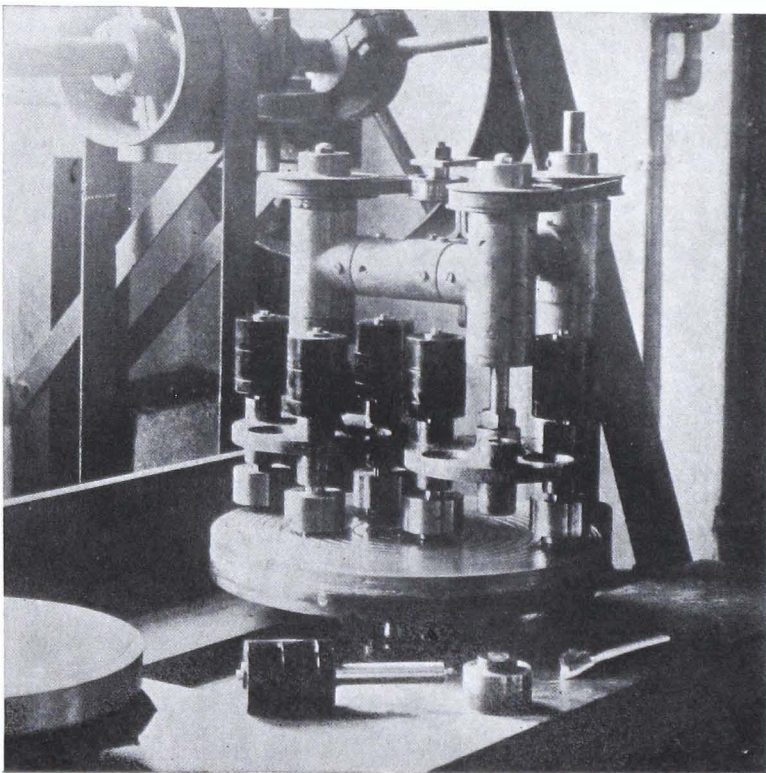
SECTION MACHINES ASSEMBLED ON TABLES.
